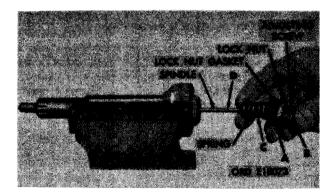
REMOVING OR INSTALLING LOCK NUT, ADJUSTING SCREW, SPRING, SPINDLE, AND GASKET.
